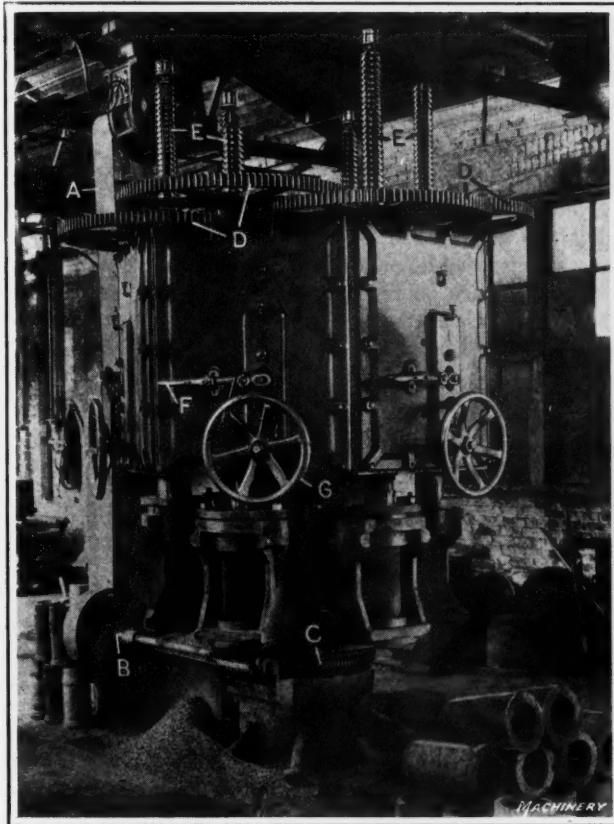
Special Progressive Type of Machine used for Continuous Operation in boring Cylinder Liners for Avery Tractor Engines
